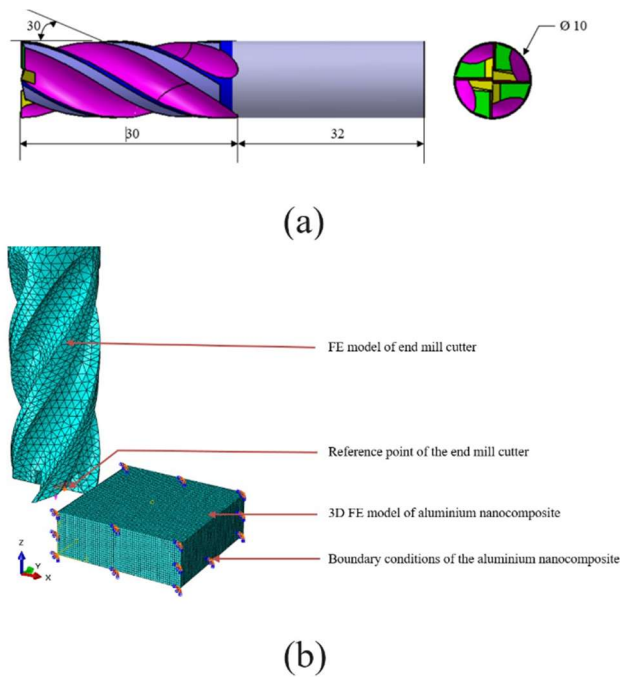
a) Three-dimensional model of the solid carbide end mill cutter and b) three-dimensional finite element model of end milling aluminum nanocomposite.
